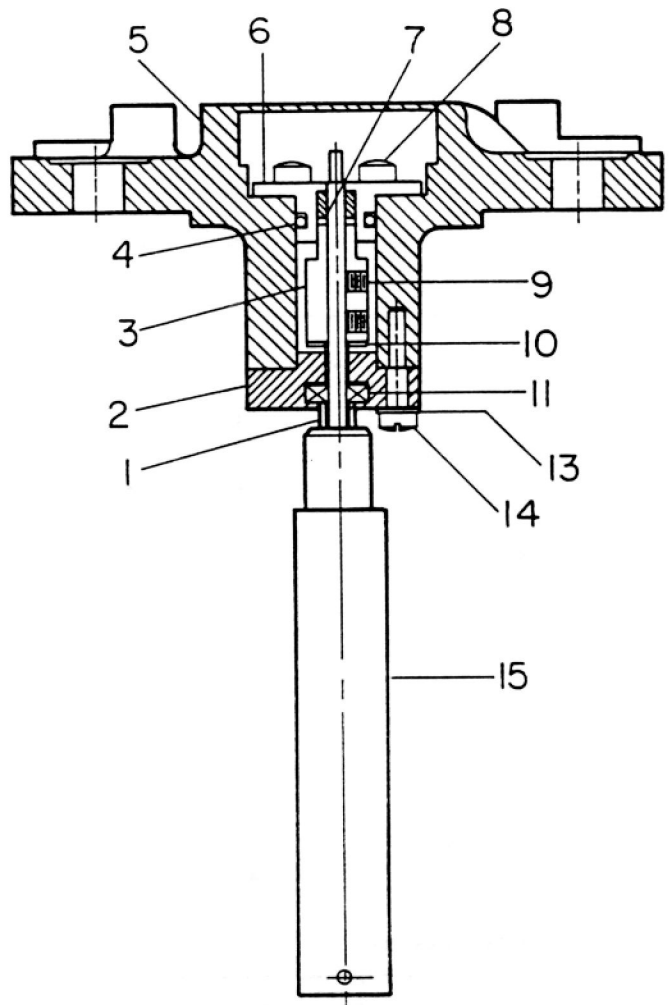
, Table 6-9 - Counter Base Plate Assembly
